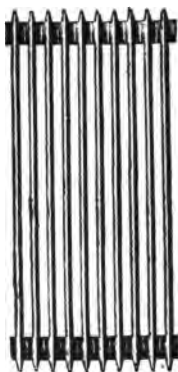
Portion of a radiator showing manner in which the individual sections are welded together.
